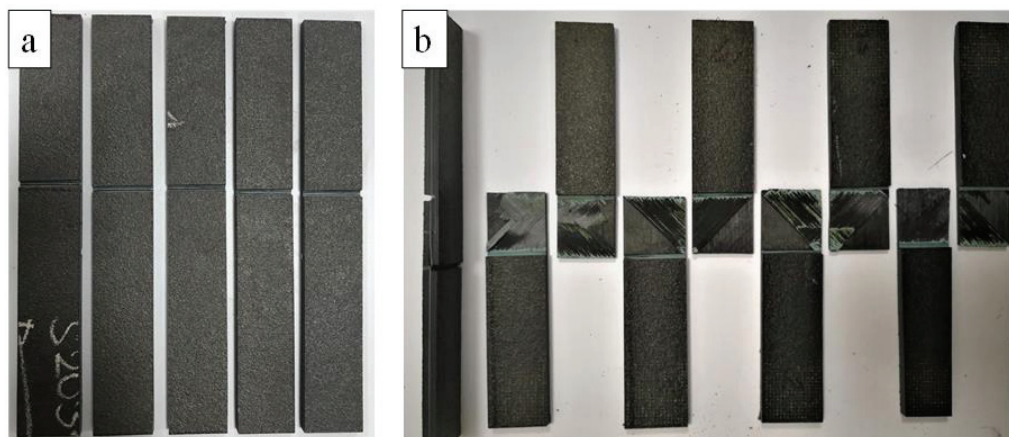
3. Single lap shear test specimen B (laser surface modification with 0.20 mm laser offset distance) a) Before the test b) After the test (the fracture surface)
